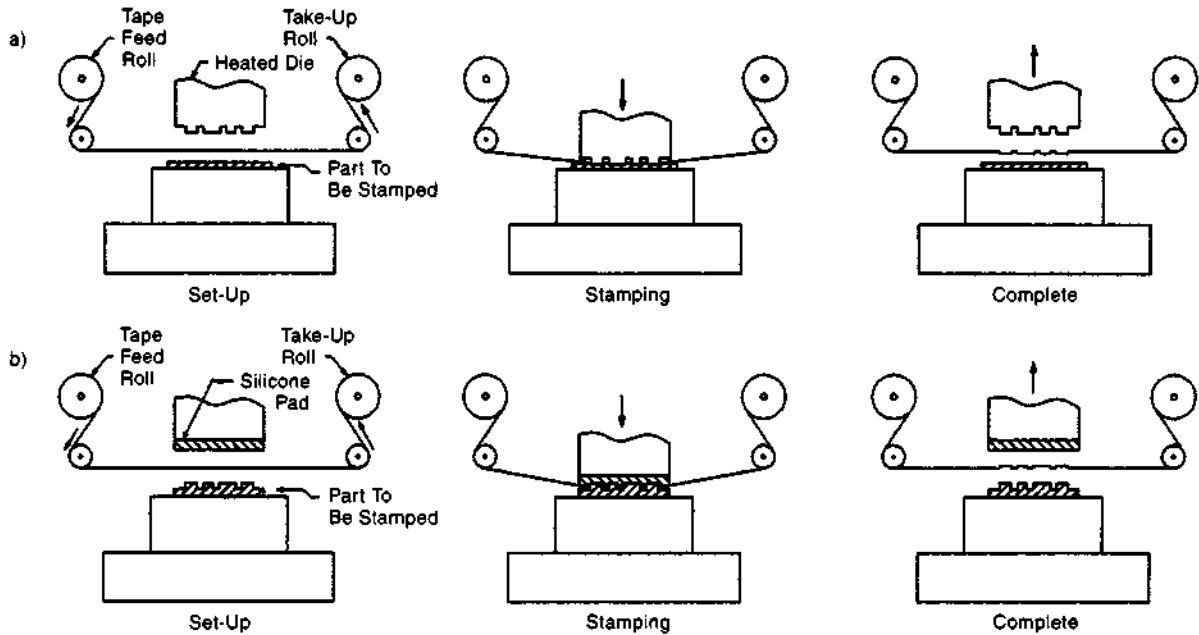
M2 Hot roll-leaf stamping of plastic parts: a) Using a heated metal die, b) Using a hot silicone pad.
